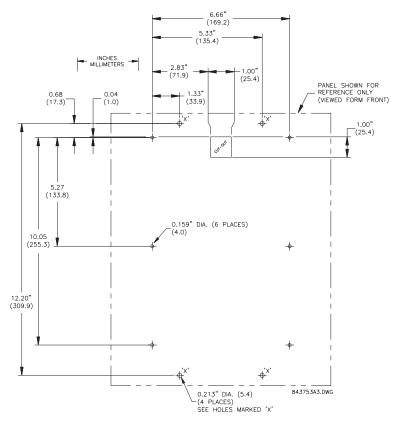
UR VERTICAL SIDE MOUNTING REAR DIMENSIONS
